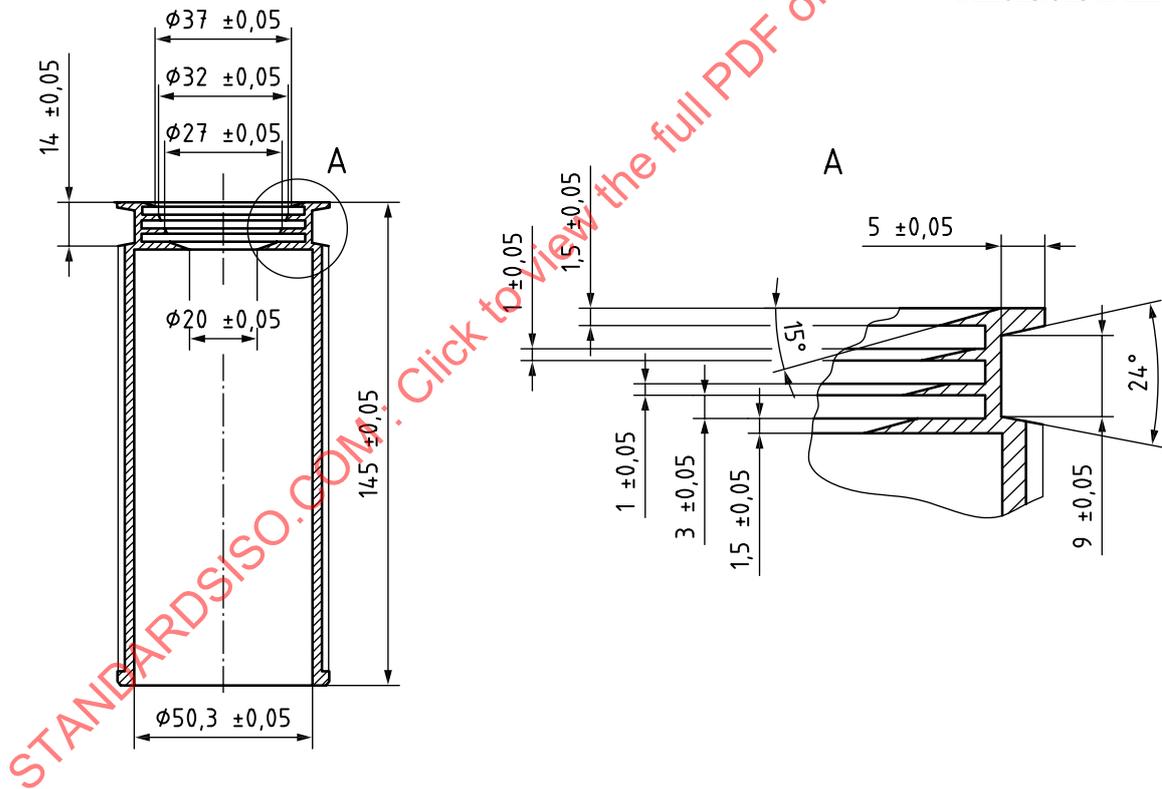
Details of flanges on movable, water cooled, heat flux meter holder
